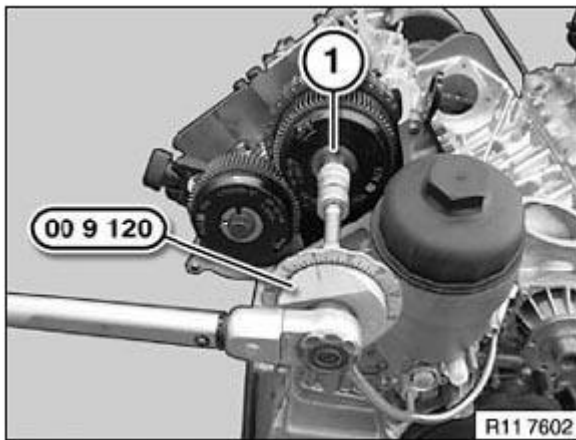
Securing Central Bolt Using Special Tool (00 9 120)
